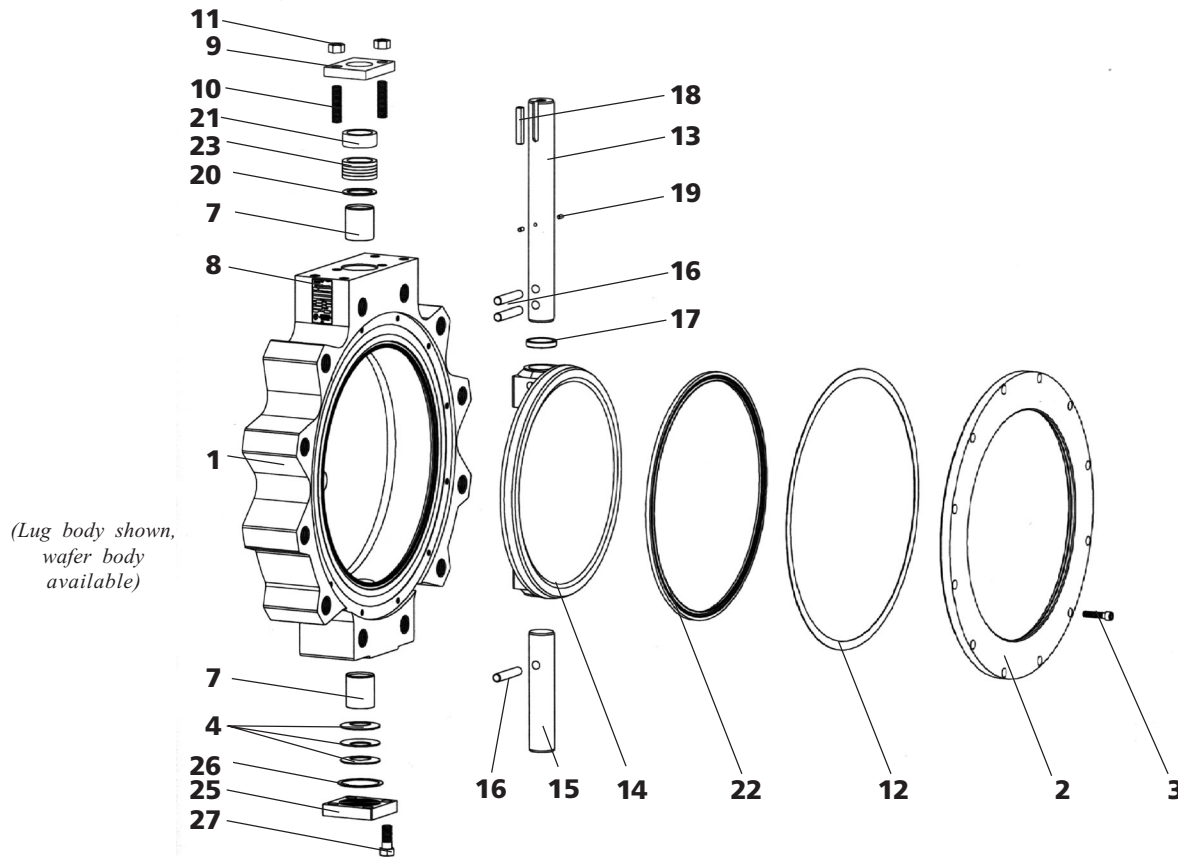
Cooper Cameron Valves' W-K-M 14"-30" Class 150, 12"-24" Class 300, 10"-12" Class 600 DynaCentric Butterfly Valve Components.
